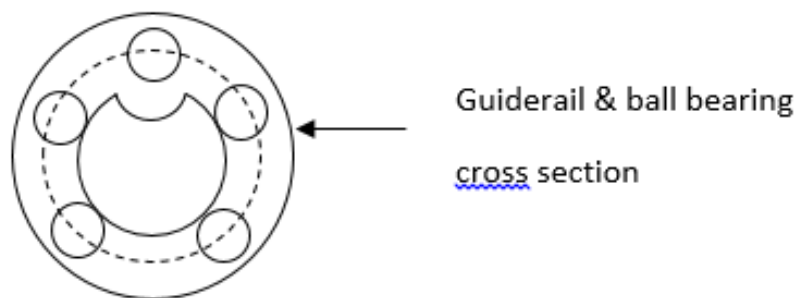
Guide rail and Ball Bearing Cross-section Figure
